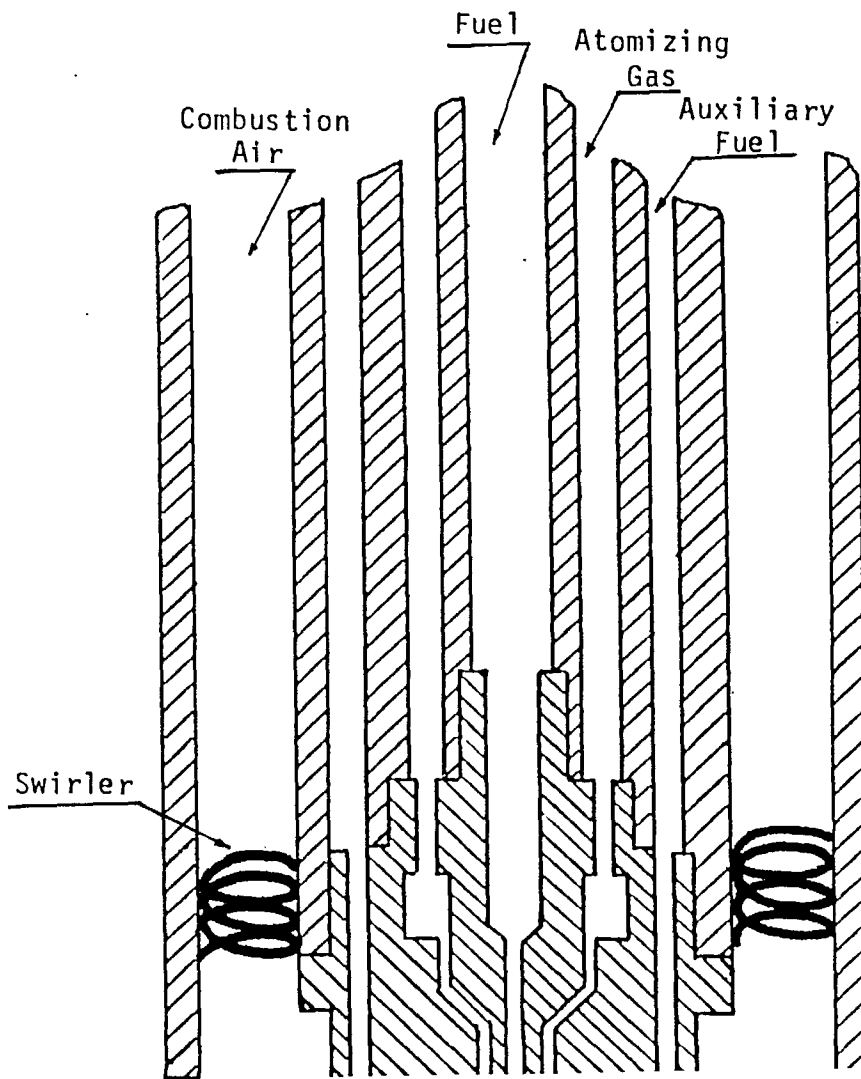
CCRL pilot-scale coal liquid mixture burner
